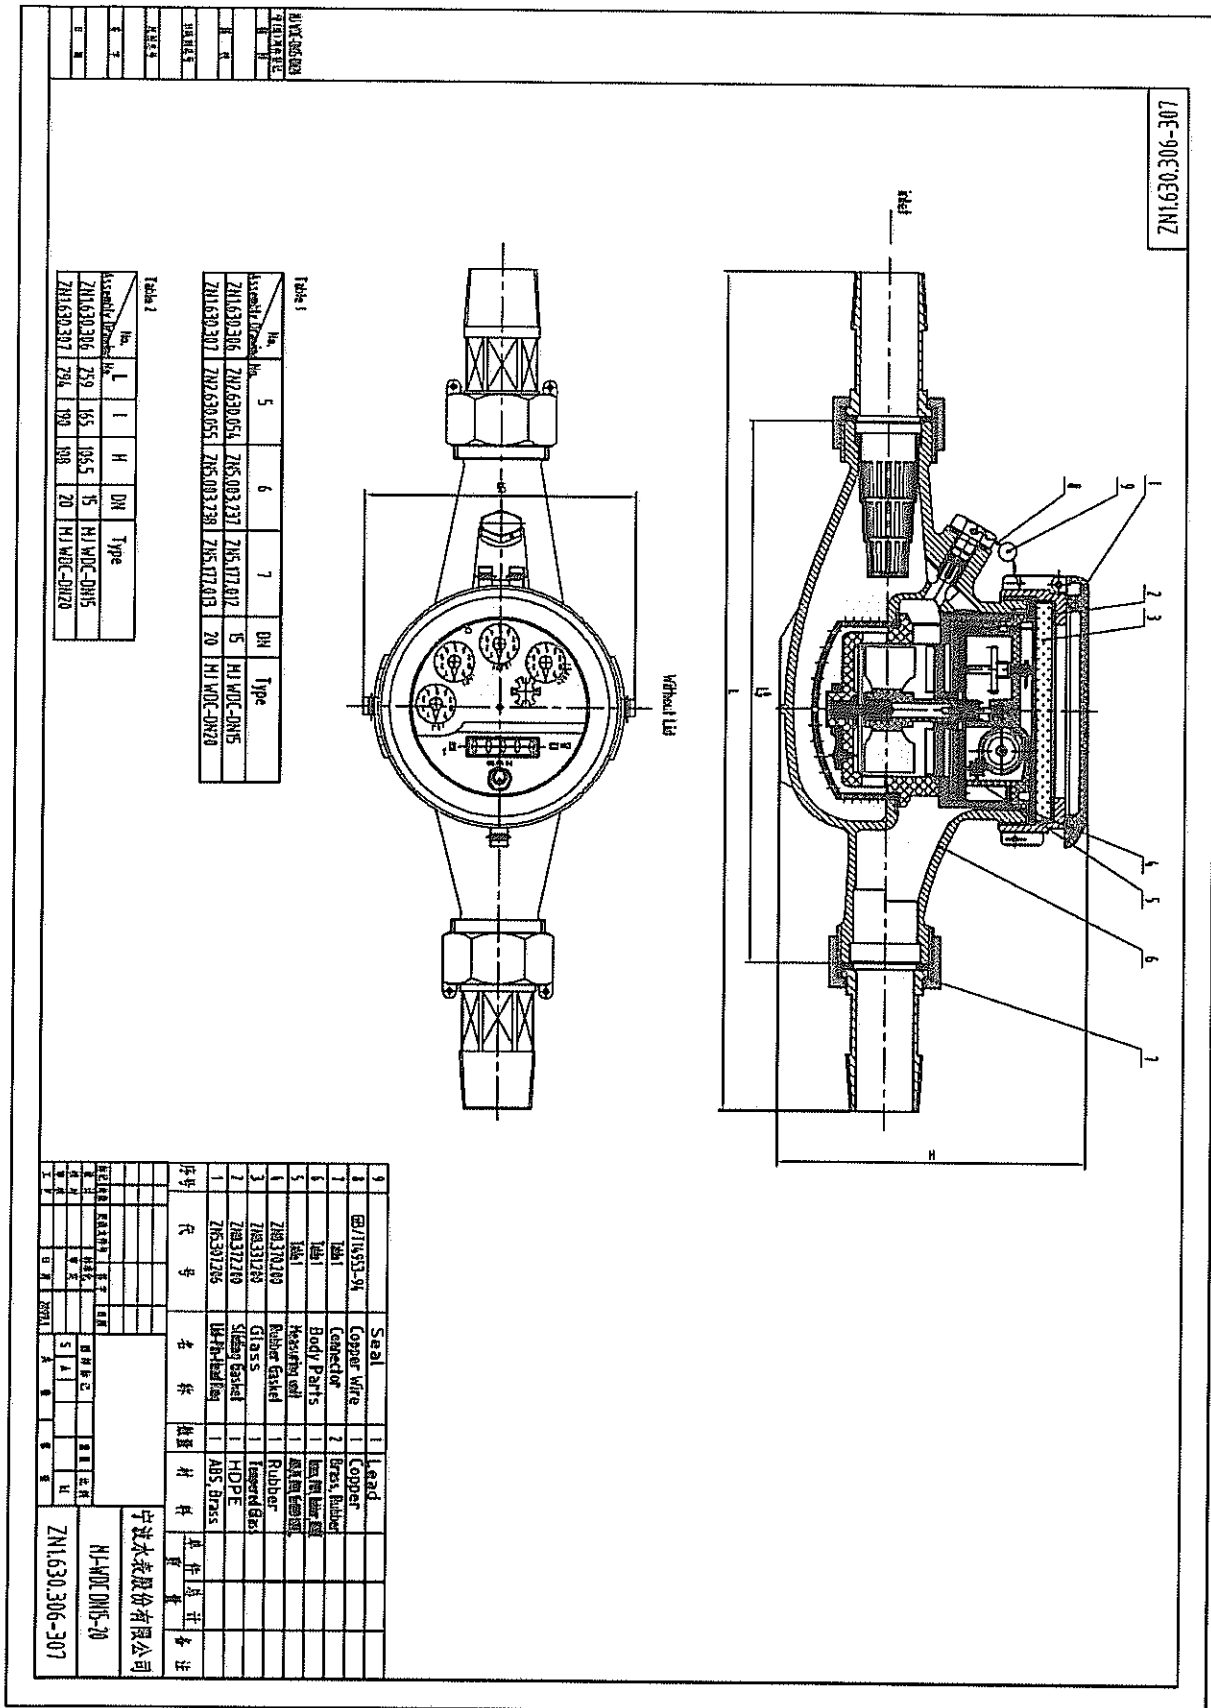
The water meter type MJ-WDC with reed impulse transmitter assembly drawings:
